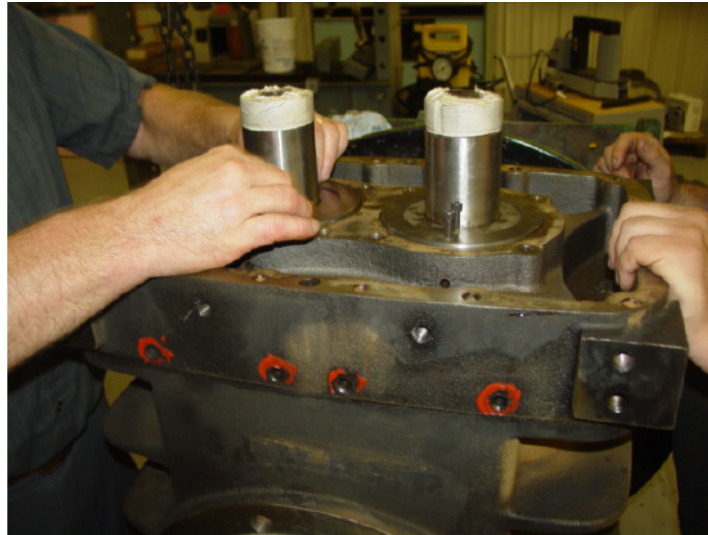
INSTALL FALSE BEARINGS IN BOTH BEARING BORES
